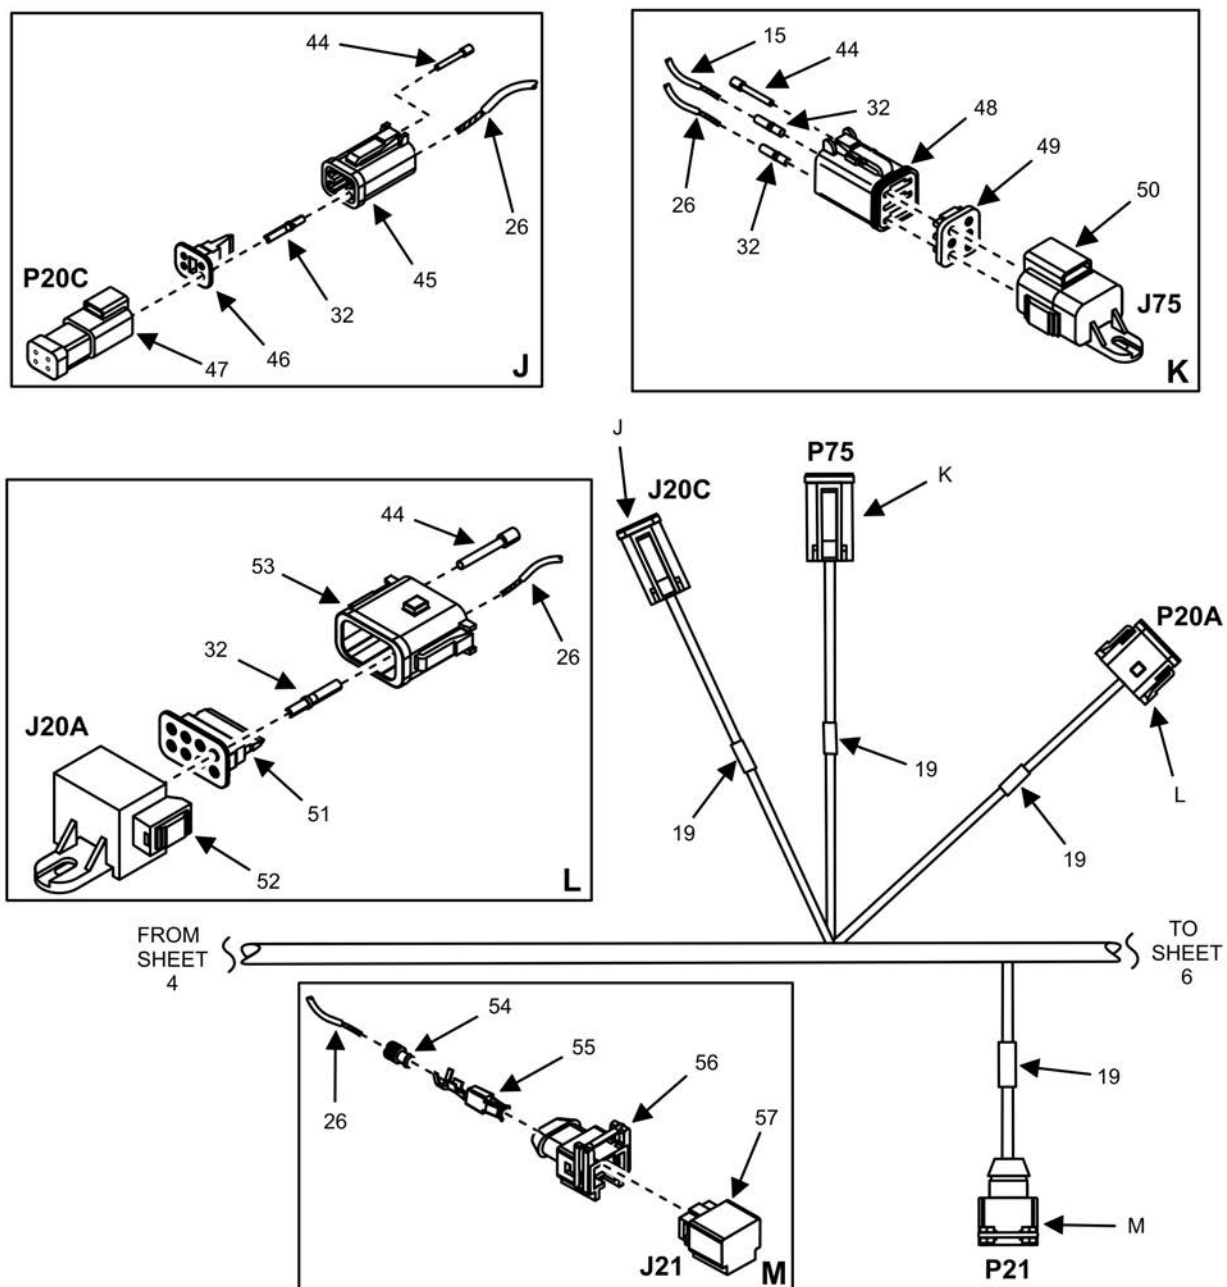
Engine Wiring Harness (Sheet 5 of 19).
